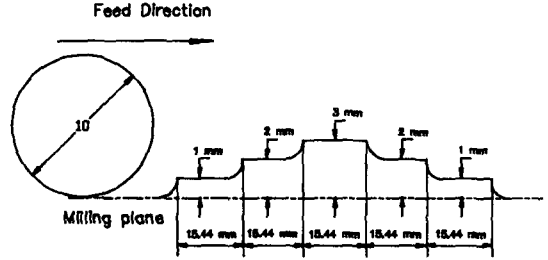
Pre-fabricated workpiece for the variable depth of cut
